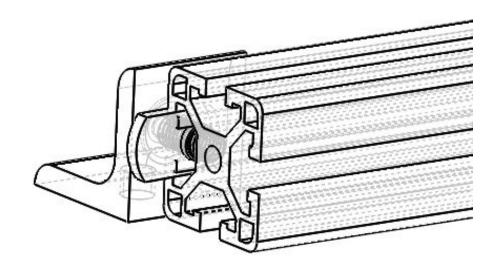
Corner bracket with end-feed fastener (#RGEC) sliding in the beam groove
